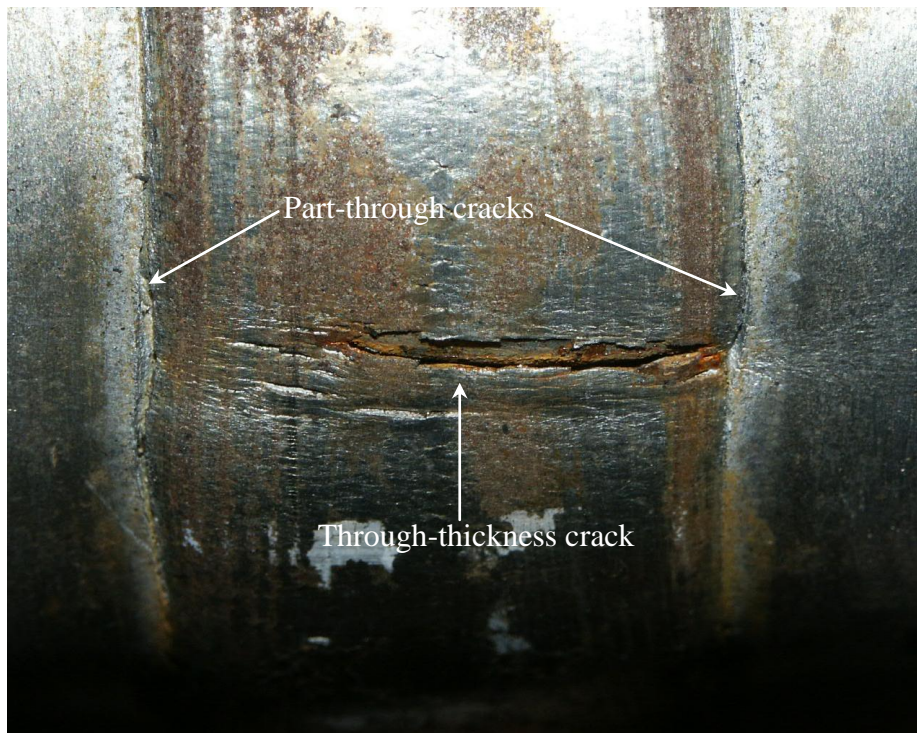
Close view of cracks on seam weld (LCF16N1)
